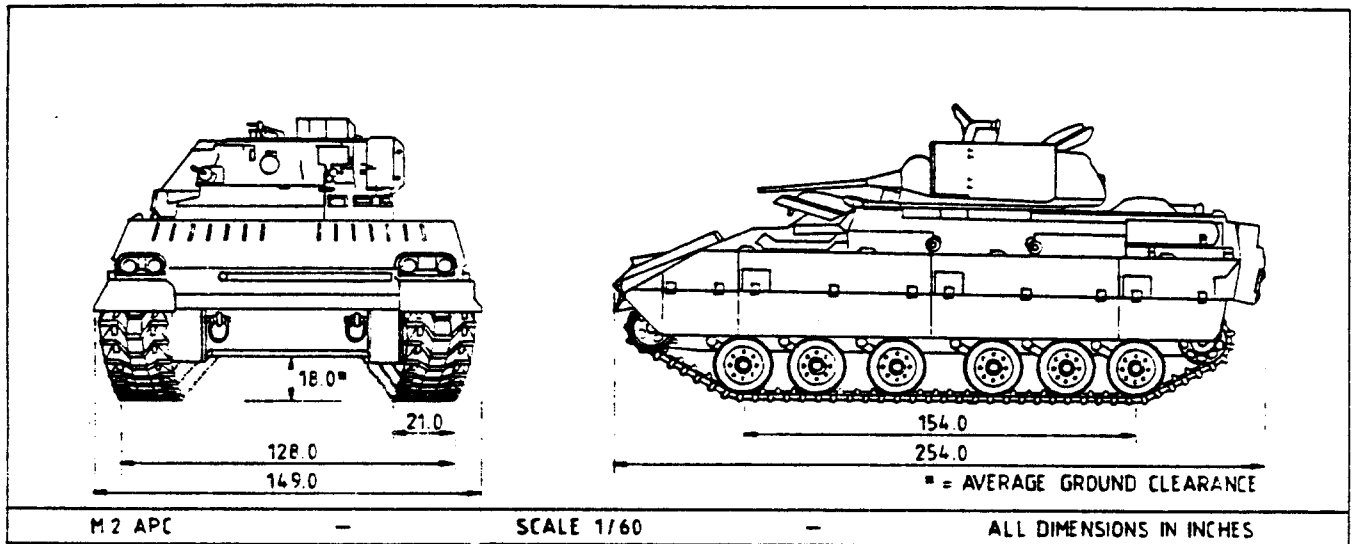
Dimensions of M2 Bradley Fighting Vehicle
